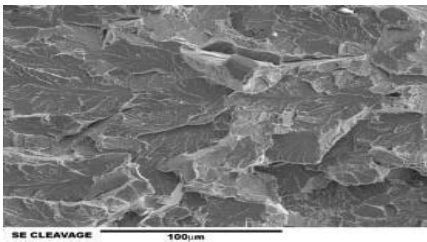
Brittle fracture of an FC-0205 powder metal control rod displaying cleavage facets. [3]
